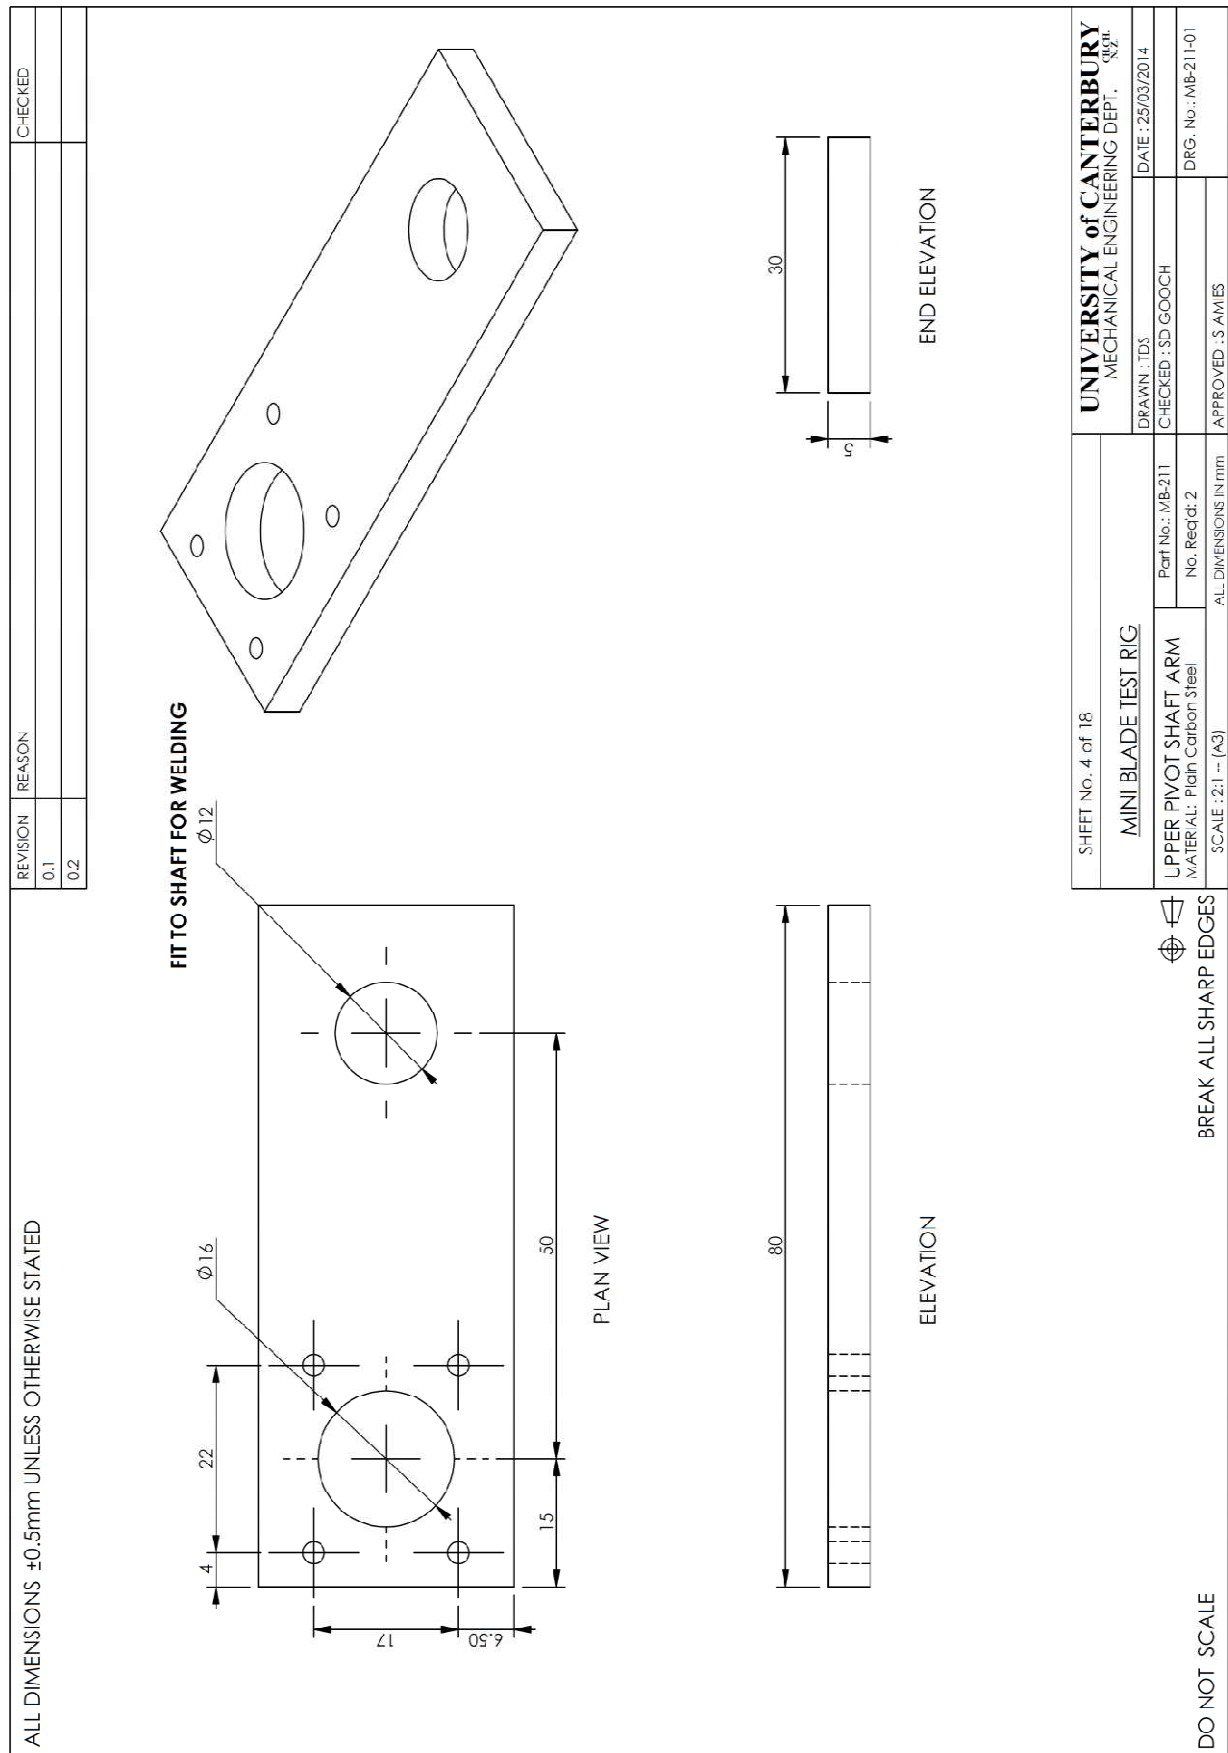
Manufacturing drawing for the upper pivot shaft arm in variable stroke test rig.
